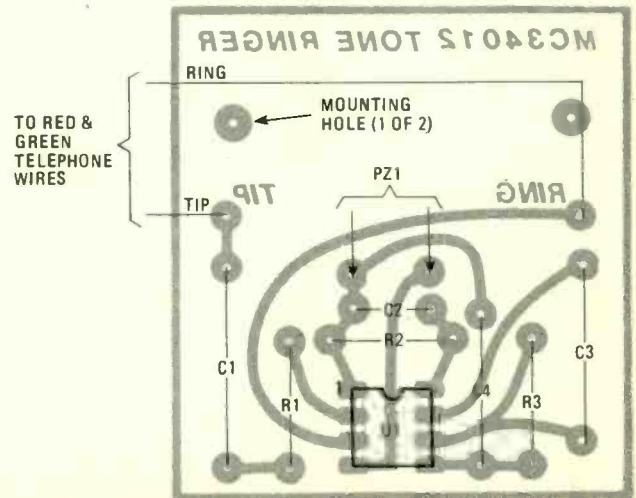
X-RAY VIEW of printed-circuit board showing circuit parts location and external circuit connection.
